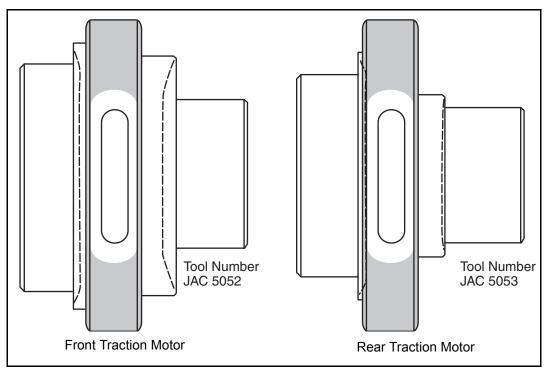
A-1. Special Bearing Mandrel (Front Traction Motors)
